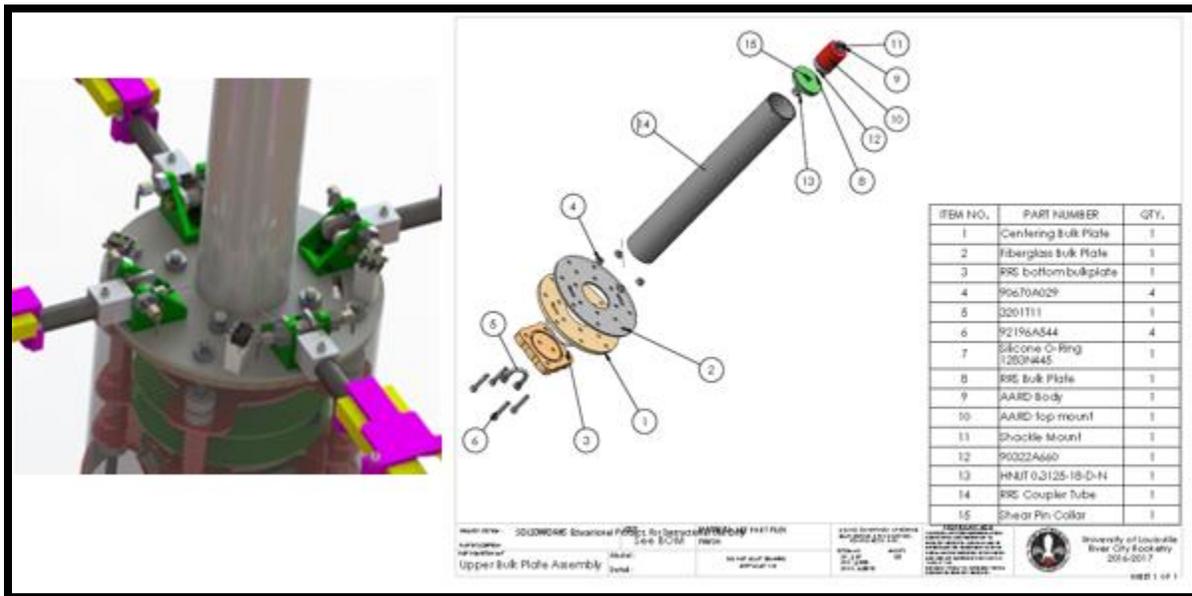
Rendering and detailed drawing of the Upper Bulk Plate Assembly.
